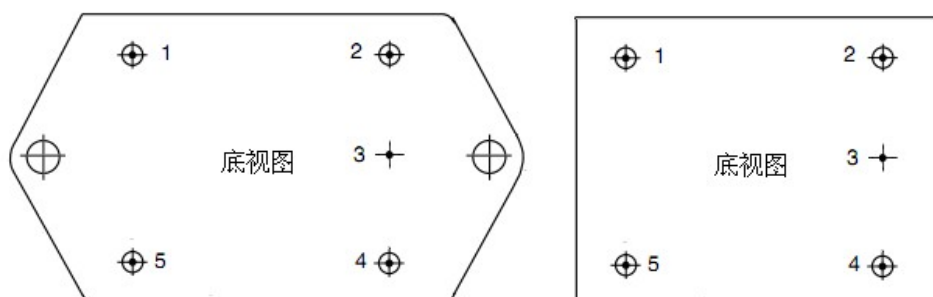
BST/ (20-50) -461-75 Outline Drawing
